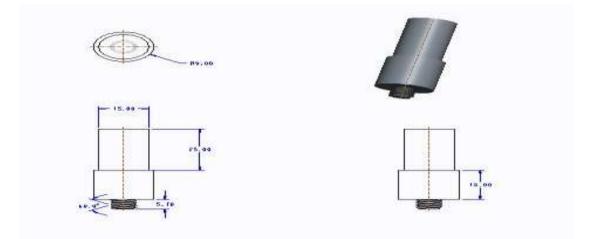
Friction stir welding tool (threaded tapered)
